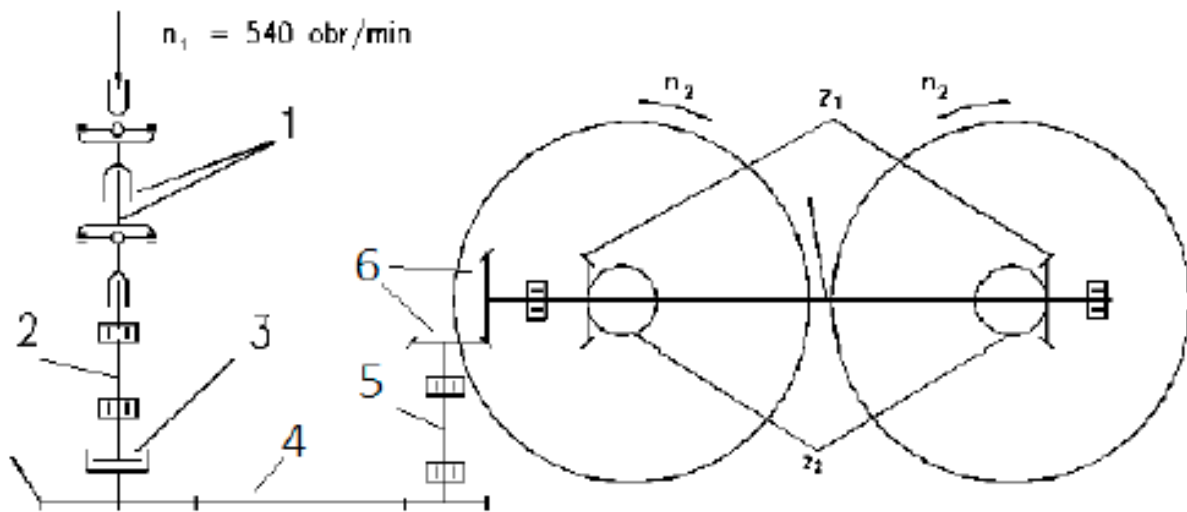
Drive system diagram: 1 – articulated telescopic shaft; 2 – drive head shaft; 3 – freewheel clutch (on large pulley); 4 – V-belt transmission; 5 – main frame shaft; 6 – bevel gear; n_1 – rotational speed of tractors PTO; n_2 – rotational speed of drums (values given in Table 2); z_1 – large bevel gear; z_2 – small bevel gear.
